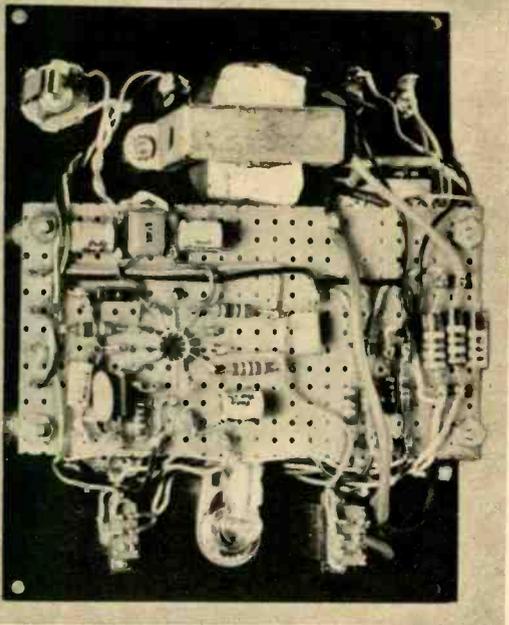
Mount parts on panel with long leads, then wire board. Install board with 1-in. spacers so back of board doesn't touch panel parts.
